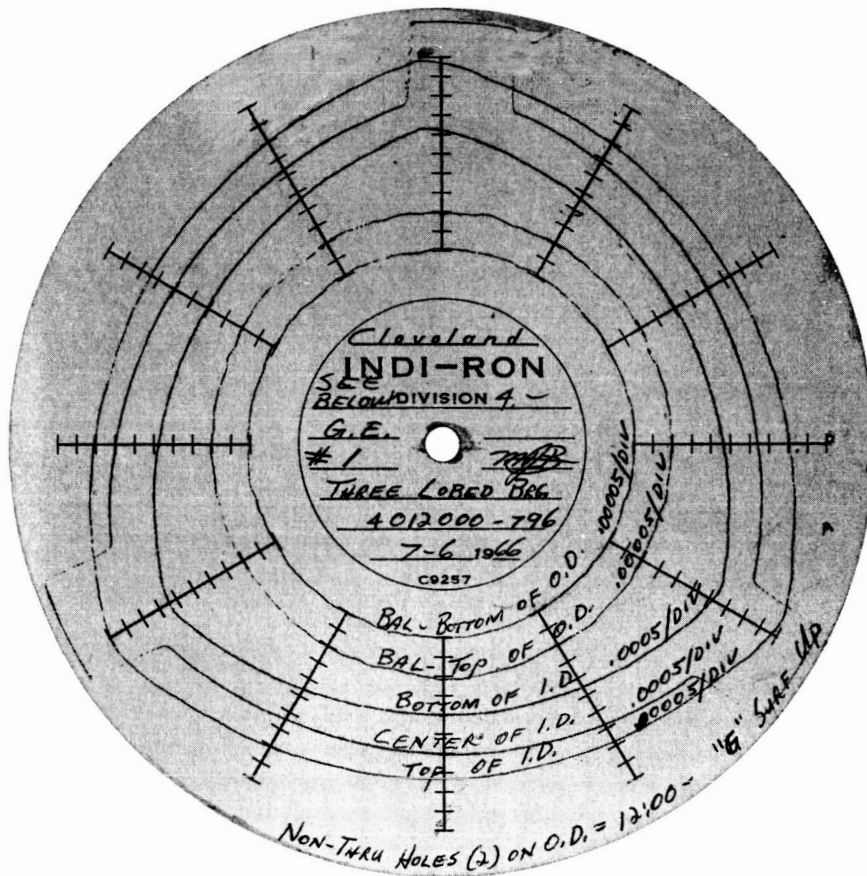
Indi-Ron Inspection Traces of Three Lobed Bearing - PT #1.
